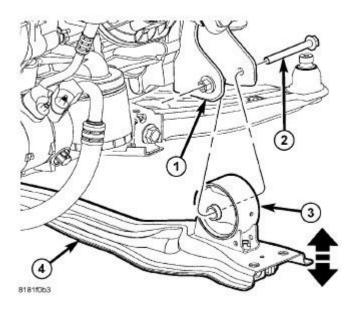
Front Engine Mount Through Bolt Courtesy of CHRYSLER LLC
